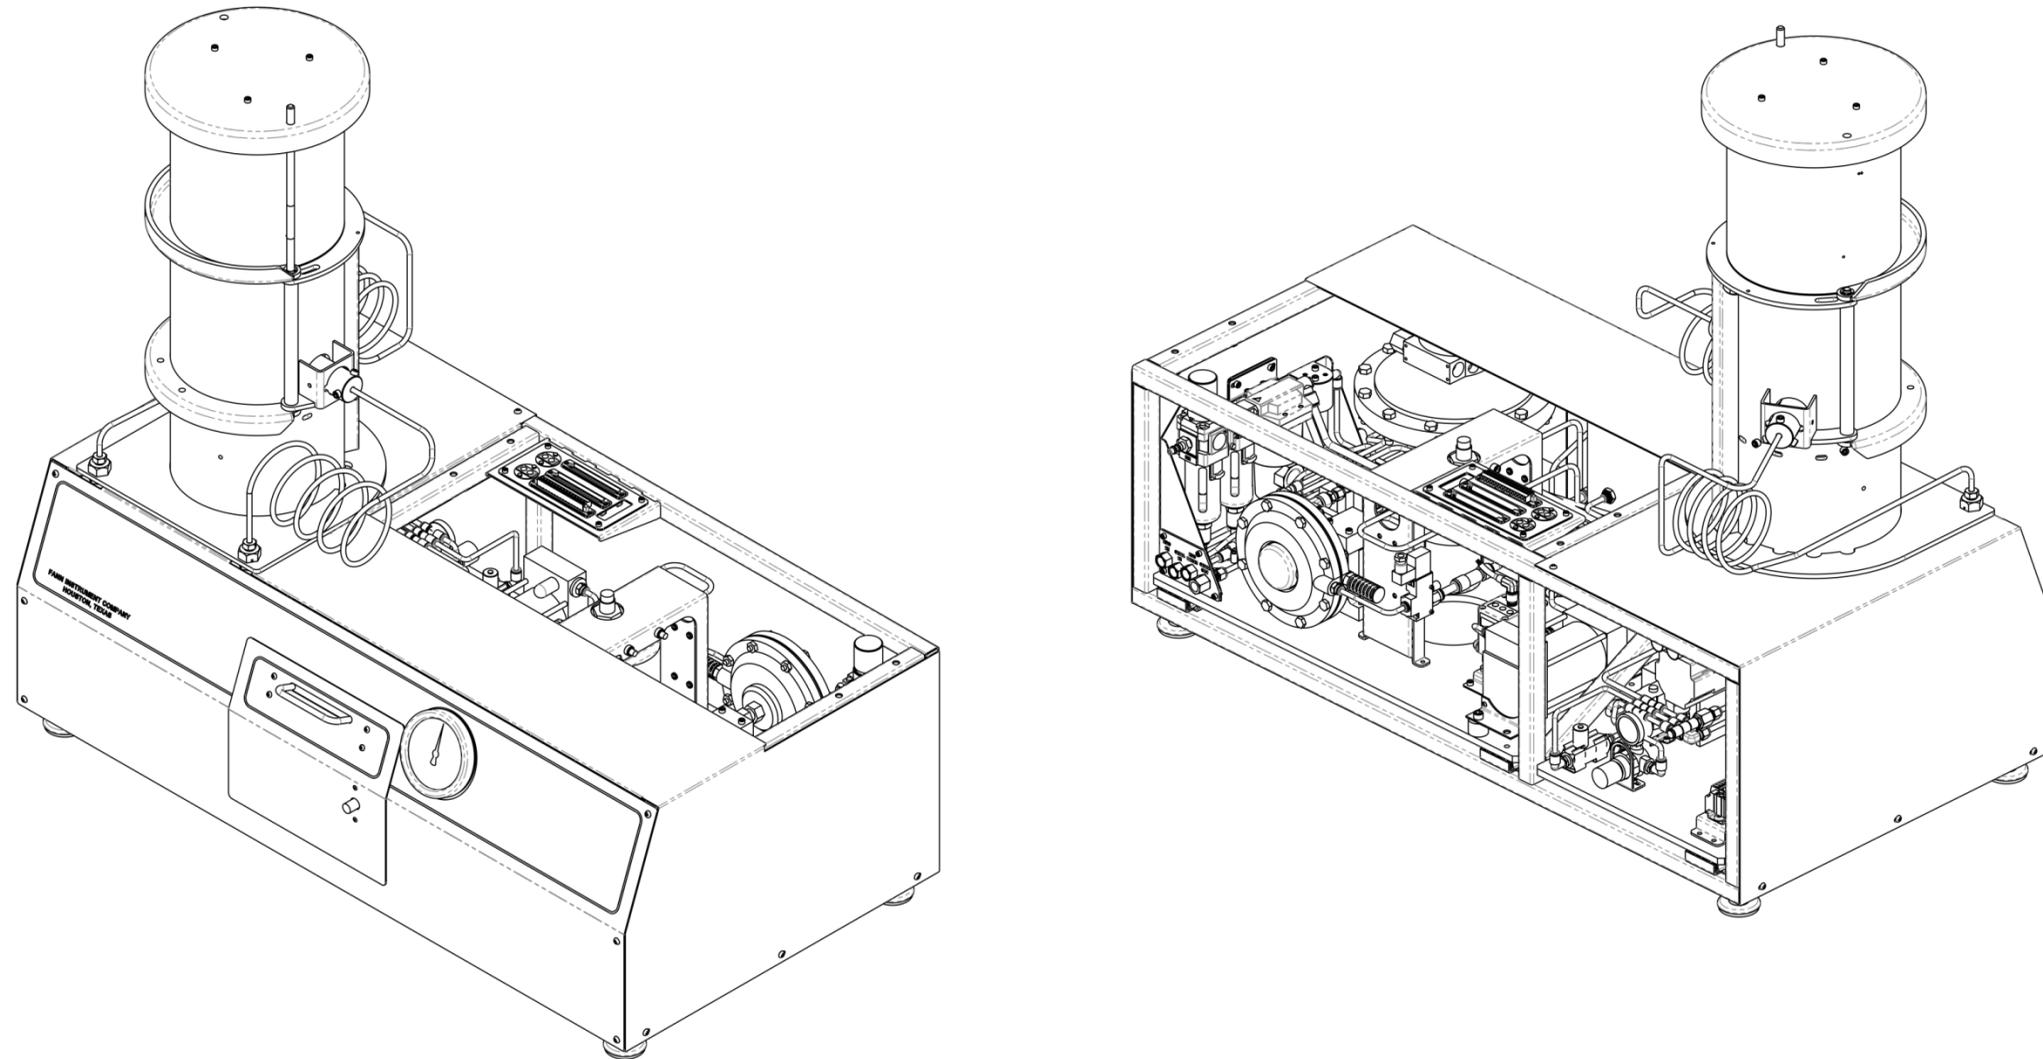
iX77 Mechanical Assembly, Front & Back View
